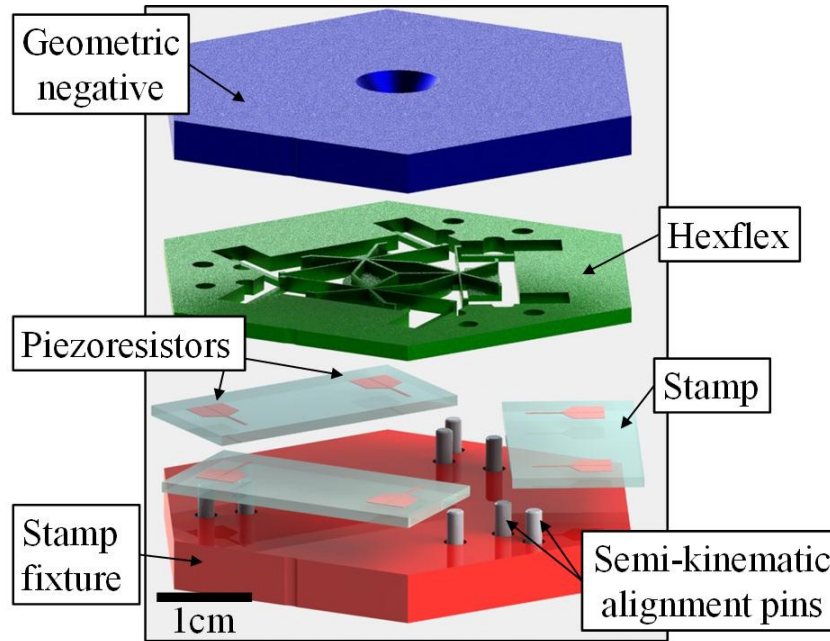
Exploded view of transfer fixture setup, showing main components in the stack. The alignment pins are within the perimeter of the Hexflex so that the stamps can be pressed towards the center to preload.
